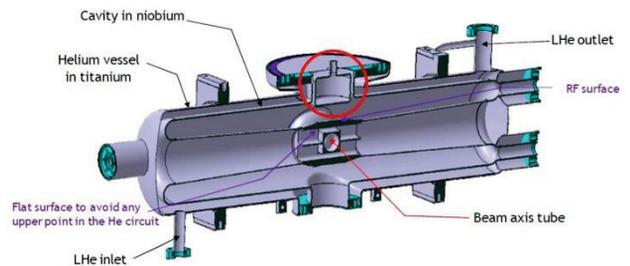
Drawing of the IFMIF HWR. The hollow plunger (circled) is cooled by liquid helium [6].
